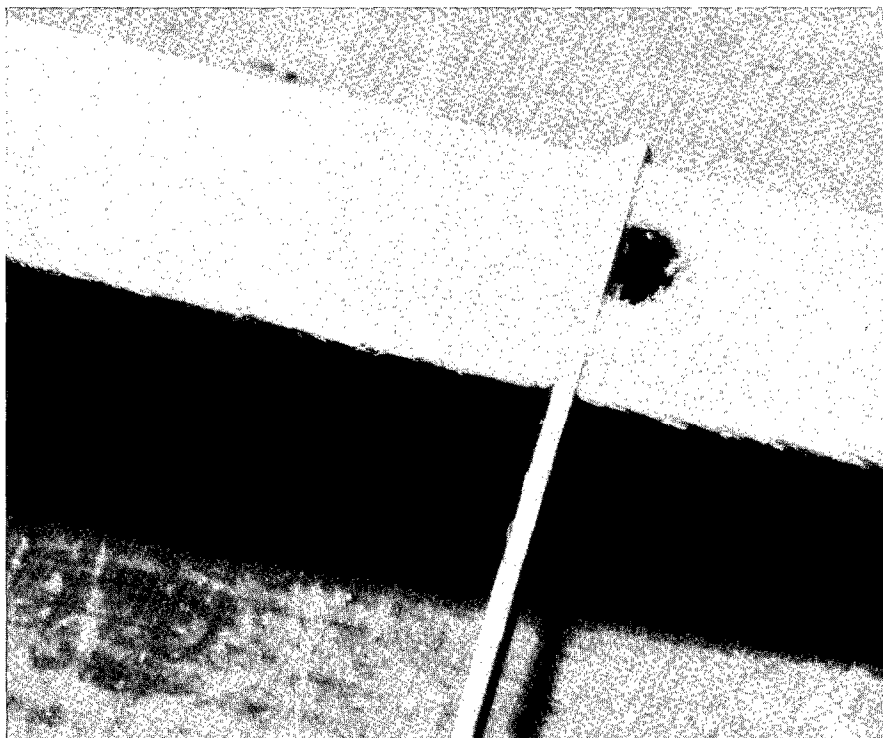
Make a cut with a fine saw into side of hole as shown here.
